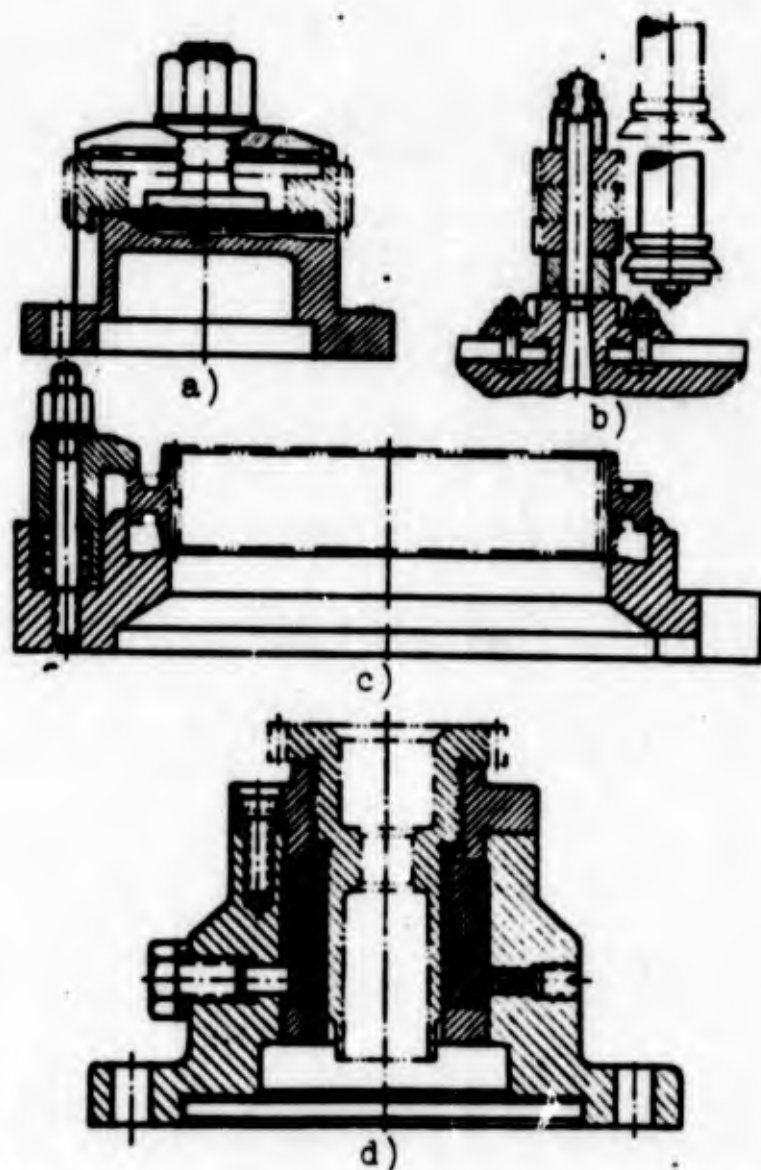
Examples of installation of gears on gear shapers. a, b, c) on rigid cylindrical setting elements; d) in hydraulic bushing.
